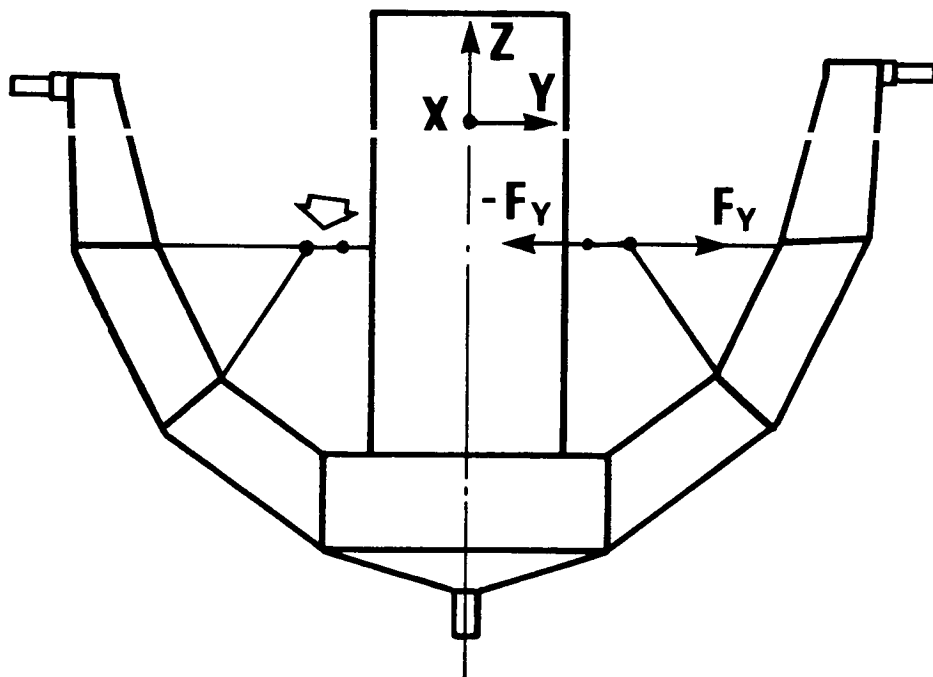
Grabber arm configuration (dimensions in millimeters).
